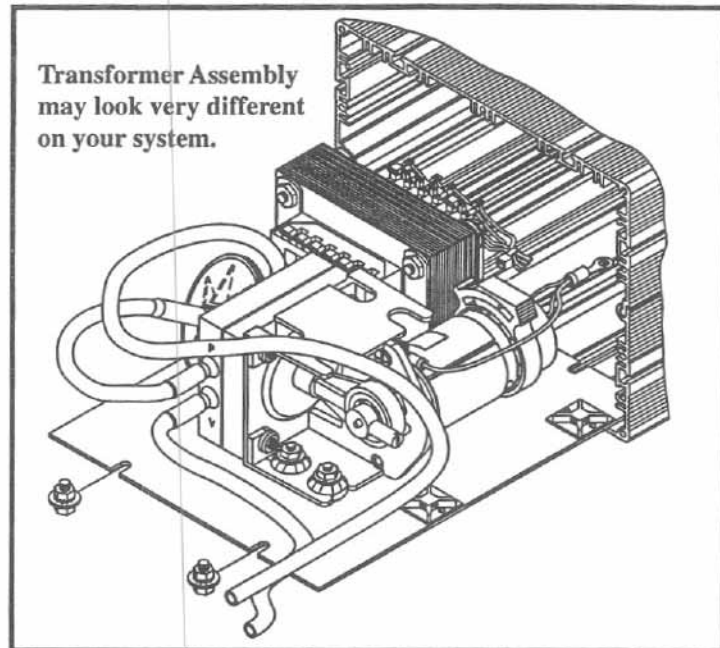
REMOVING TRANSFORMER ASSEMBLY
